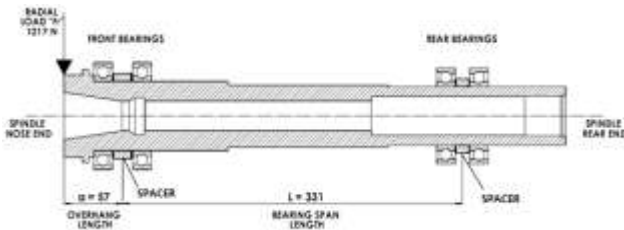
Bearing Arrangement 3 with Radial Load 1218,
